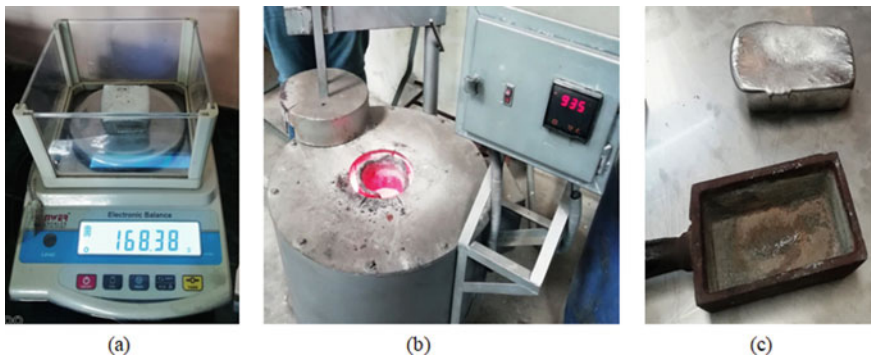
Composite development through stir casting. a Electronic balancer. b Electric furnace. c Mold with composite brick
